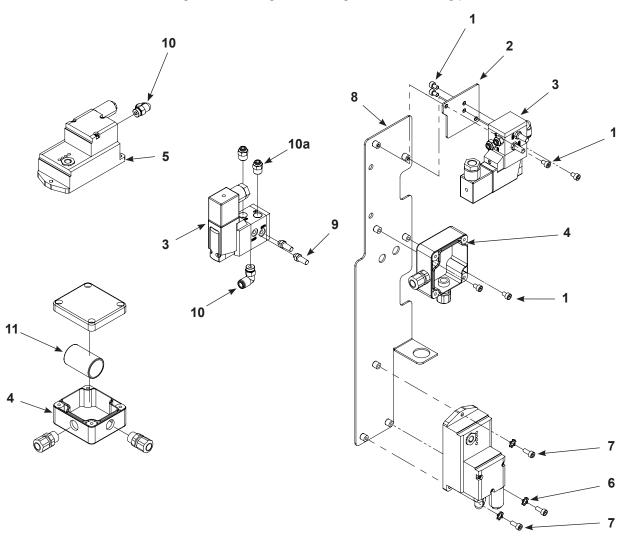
Electronic Control Kit Assembly View (1 of 2)
